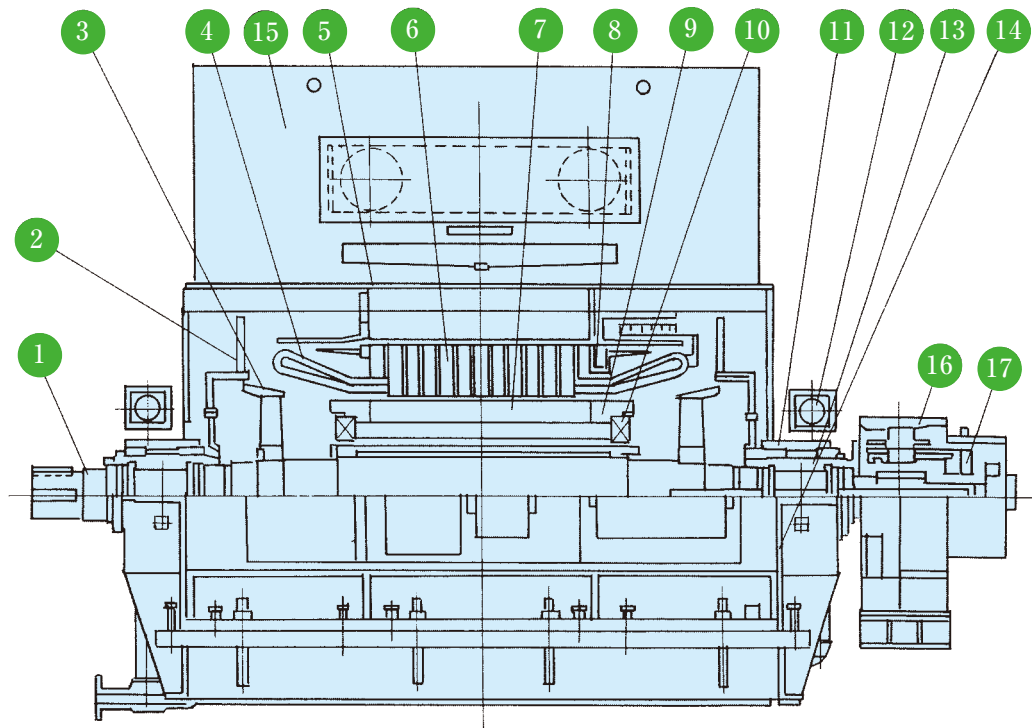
Totally enclosed inner cooling type - Cooler mounting
